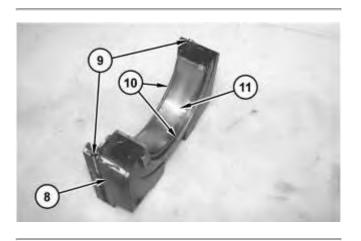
01377324This Illustration is of the rear main bearing cap.
